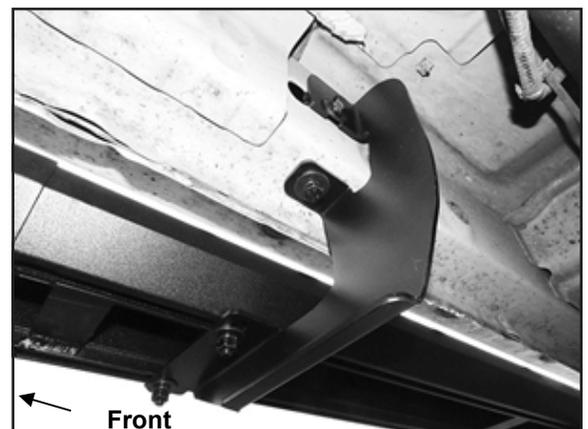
Attach Running Board to passenger/right rear Mounting Bracket.
